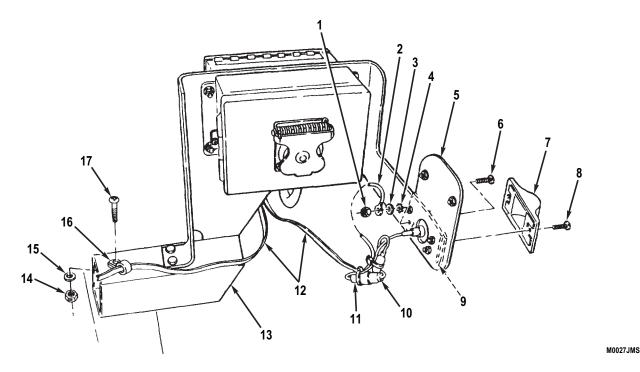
Front Dolly External Marker Clearance Light Cable Assembly Disconnection.
